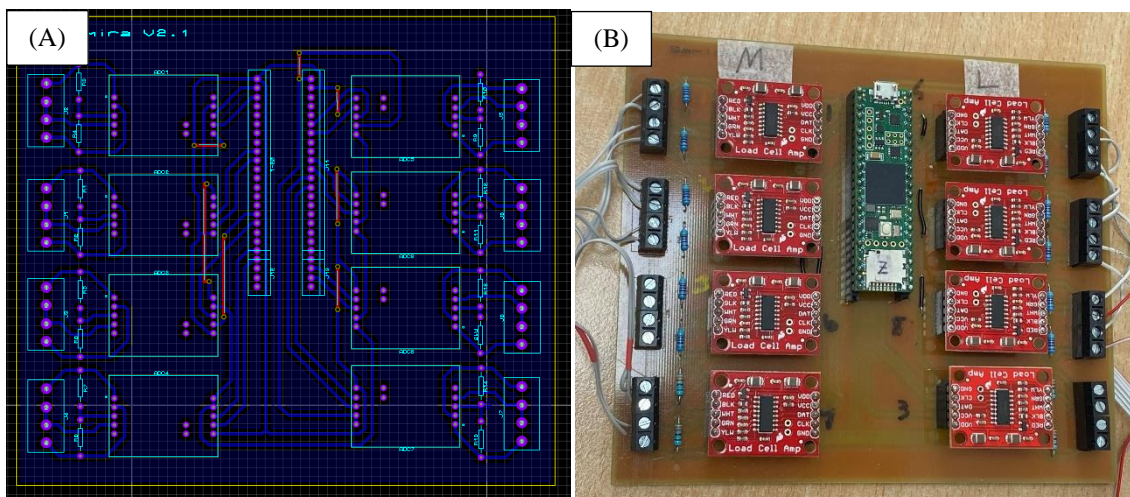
PCB 2 a) Simulation b) Assembled PCB
